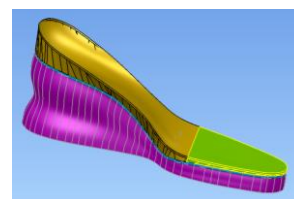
3D footwear bottom components: orthotics, filling, insole, sole
